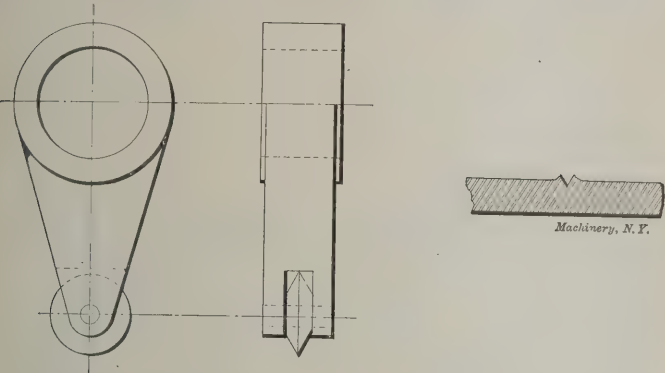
"Squeezing" Tool for Graduating in the Milling Machine. Fig. 2. Exaggerated Appearance of Impression Made by the Squeezing Tool.
